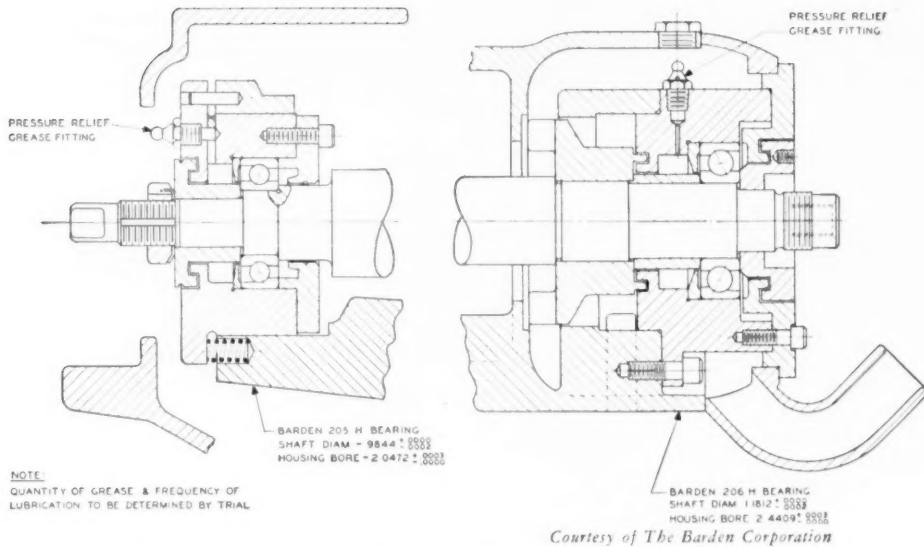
Details of a Barden router spindle adapted for grease lubrication.
